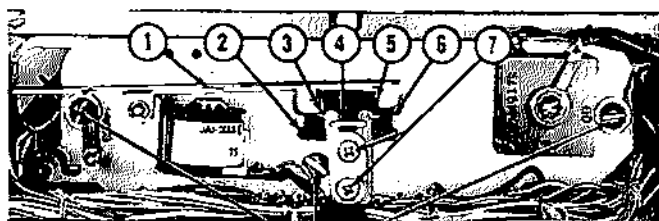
ROTATING PLATE AND ROCKER ARM ADJUSTMENT
